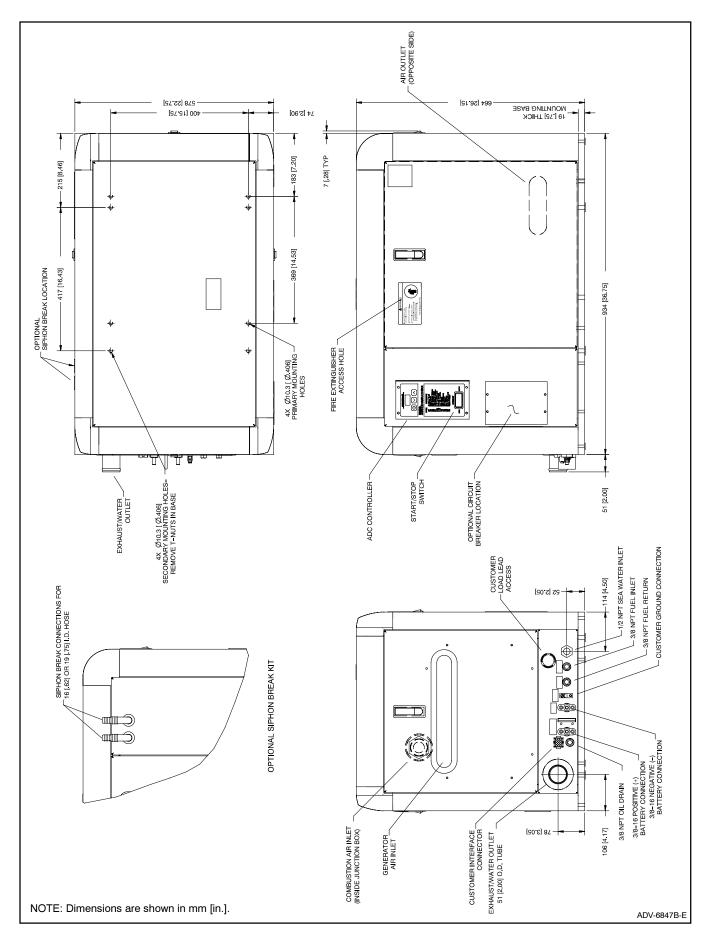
Dimension Drawing, 10EOZD and 8.5/9EFOZD with Sound Shield
